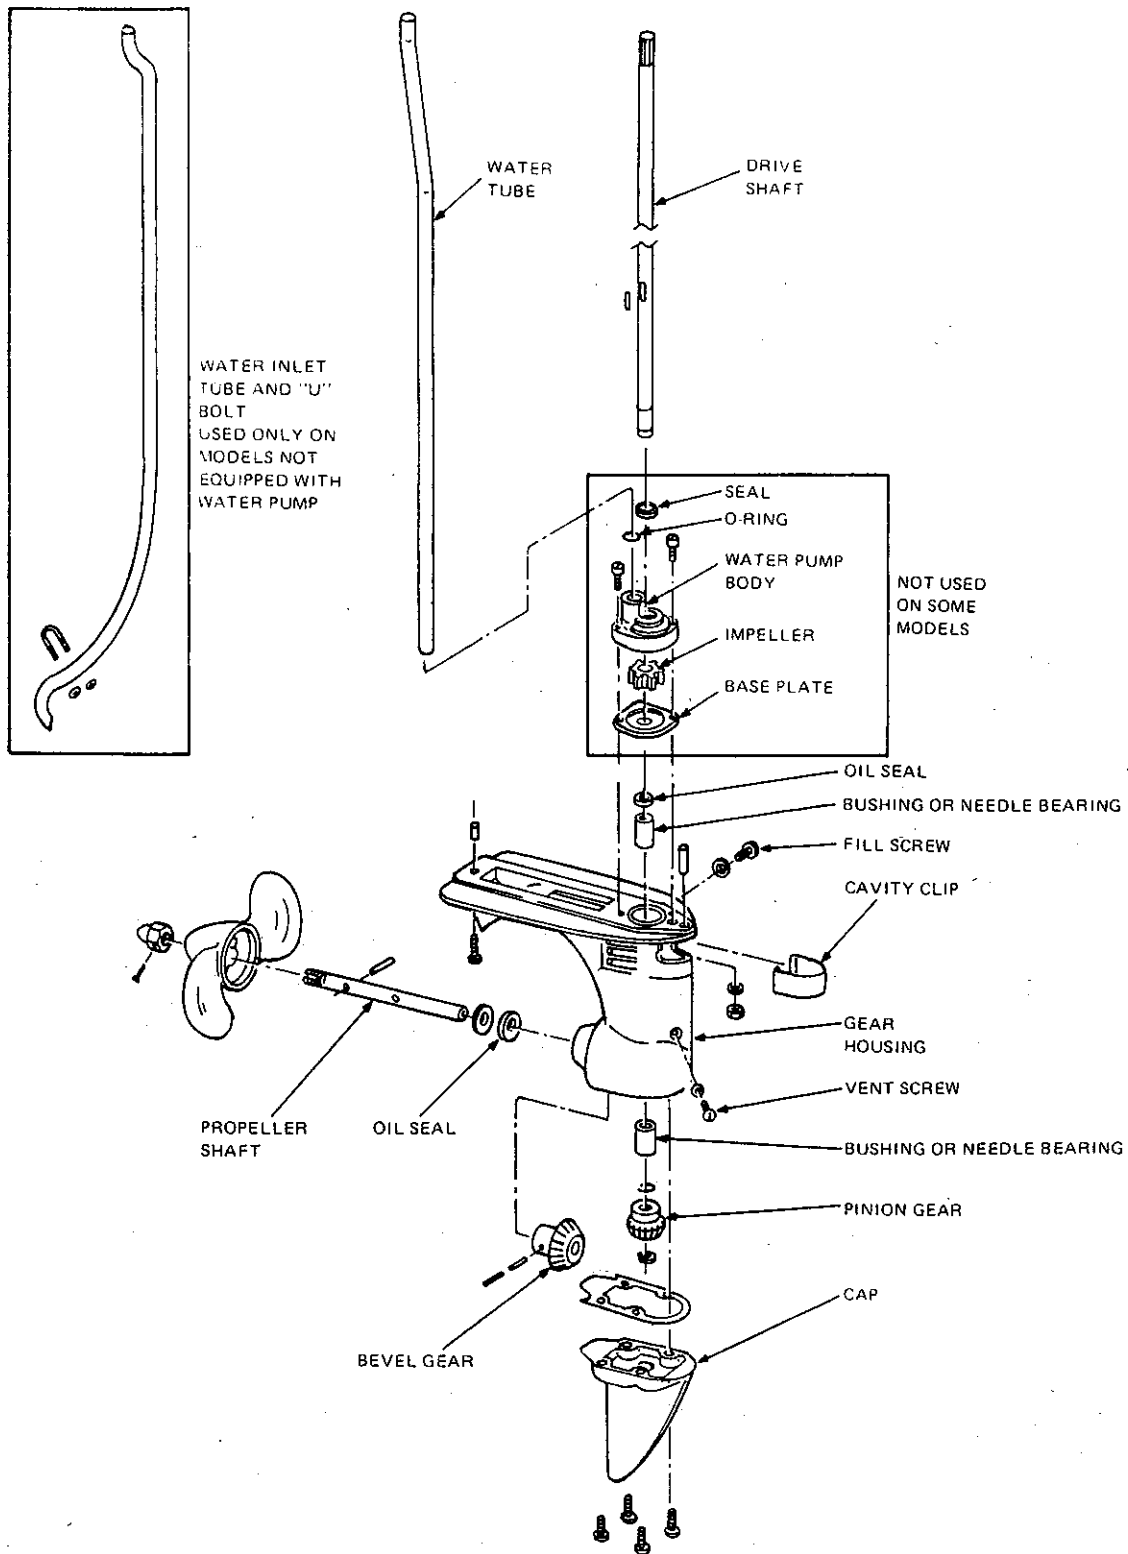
Exploded view of gear housing used on models manufactured after 1975.
